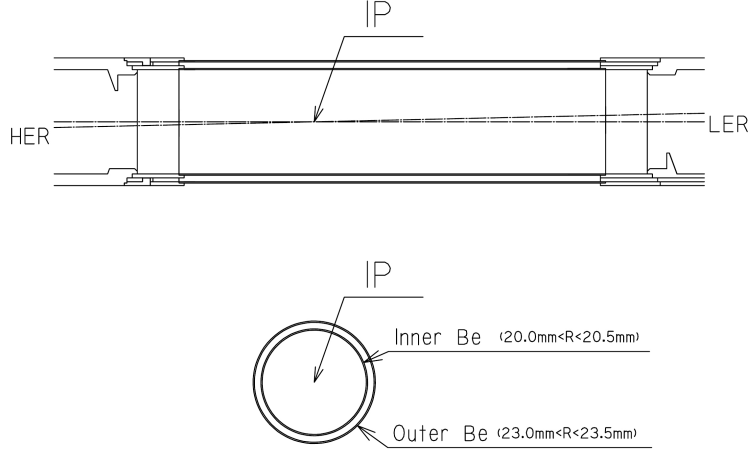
Cross-section view of the beam pipe before the detector upgrade.
